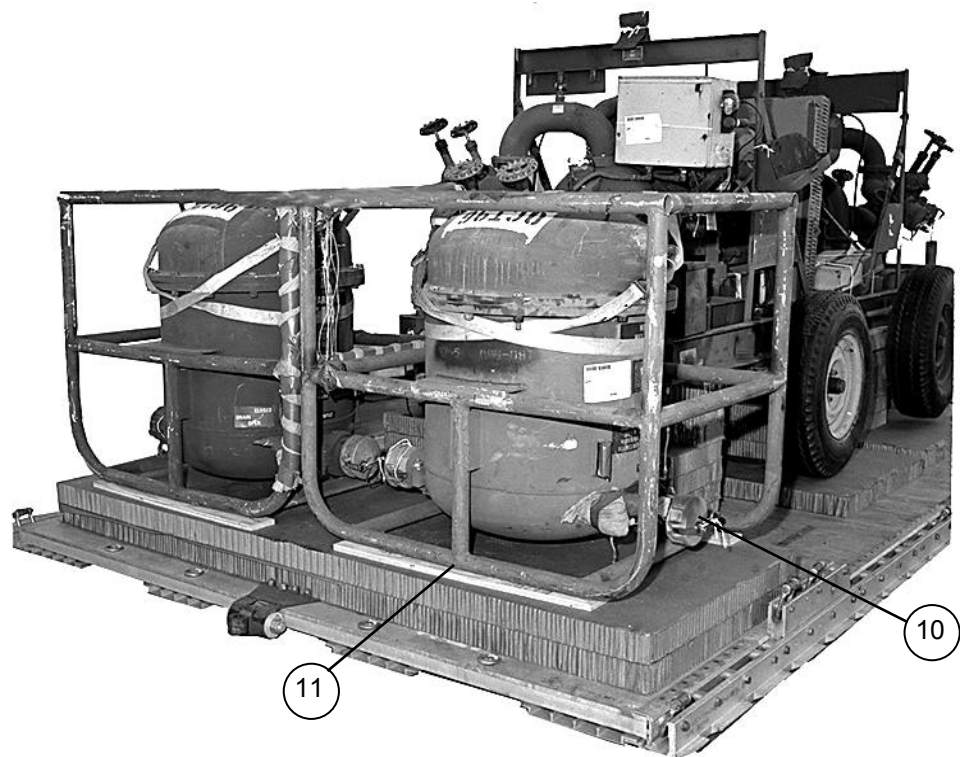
Pump Assembly and Filter/Separator Positioned (Continued)
